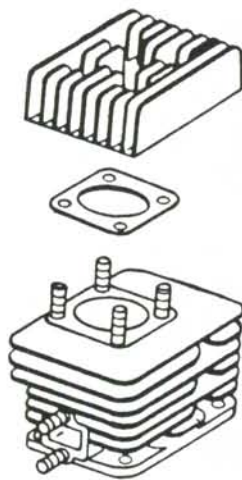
A—Exploded view of crankcase and cylinder assembly for Model K-340-2FA.
